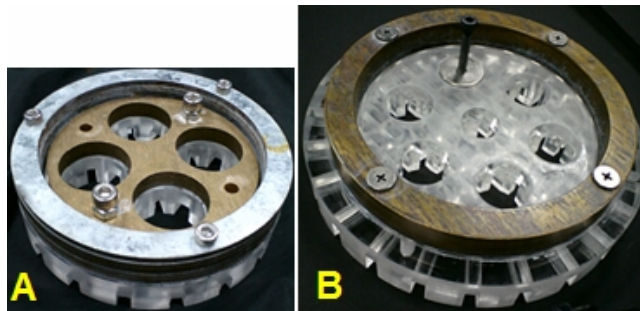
(A) (B) Different weights for small and large workpiece fixture.
